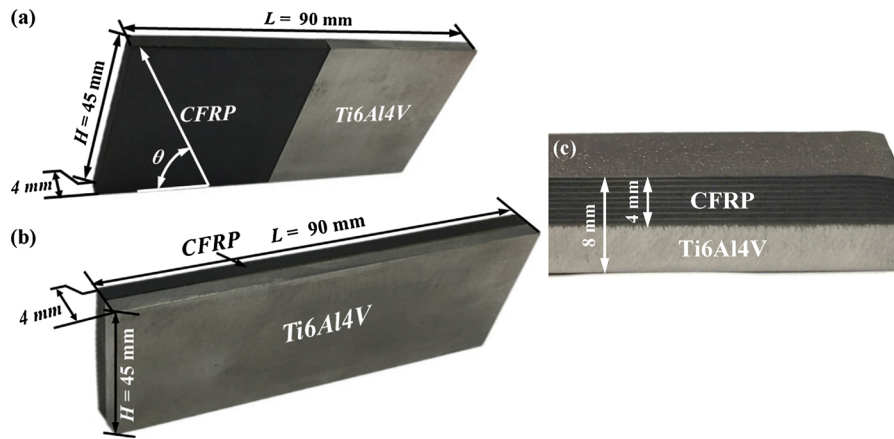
Photographs showing the CFRP/Ti6Al4V stack workpieces for the (a) orthogonal cutting, (b) interface machining and (c) hole drilling.
